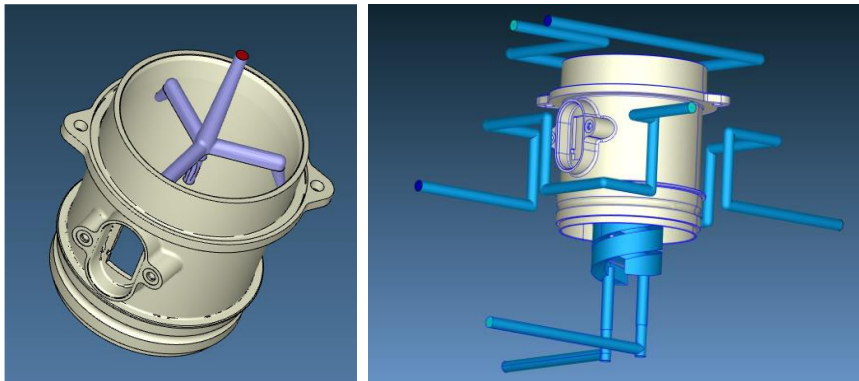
Runner geometry and location (left); 3D model of the cooling system in Moldex3D (right).
